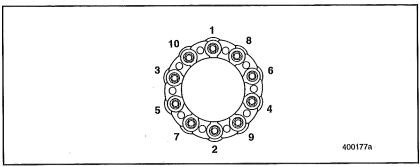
Wheel Nut Tightening Sequence with Chain Clearance Spacers
